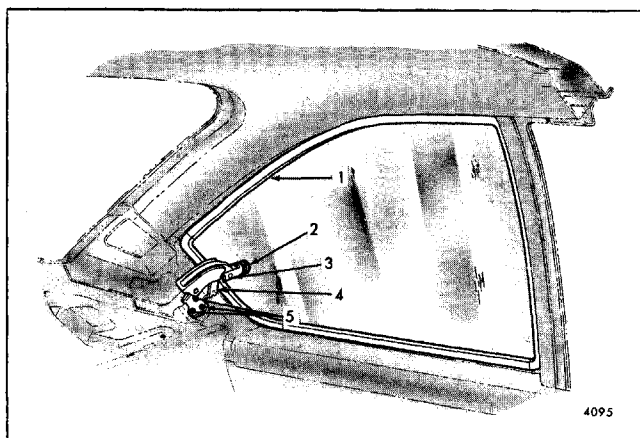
Optional Swing-Out Quarter Window - "H-11 and 77" Styles Shown ("X-17,27" Styles Similar)
